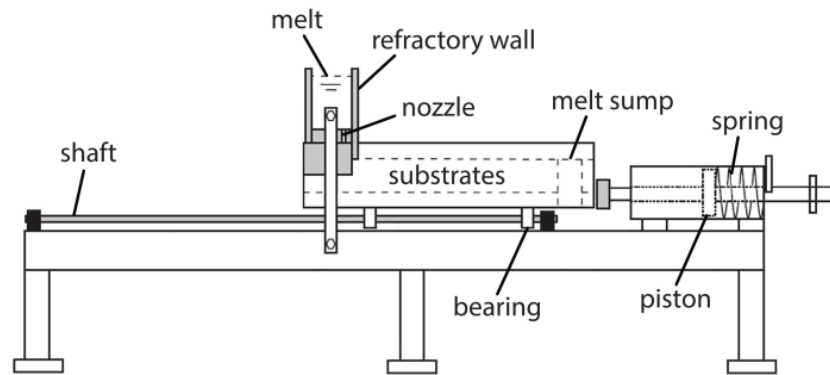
A drawing of the horizontal single belt casting simulator used by Guthrie et al. [72].
